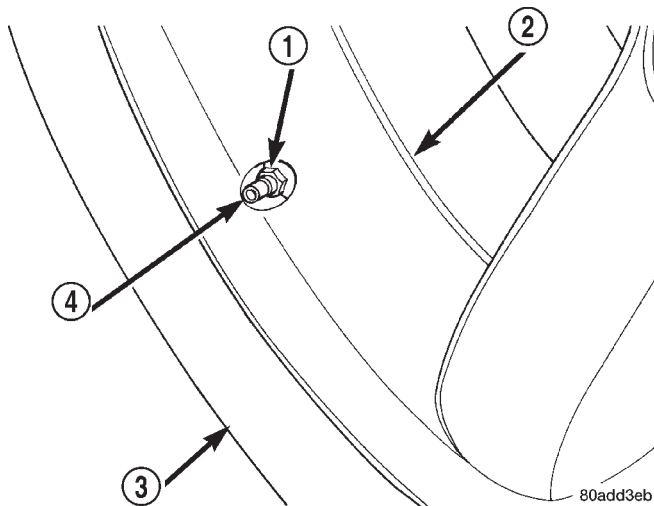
VALVE STEM/PRESSURE TRANSMITTER - TYPICAL
